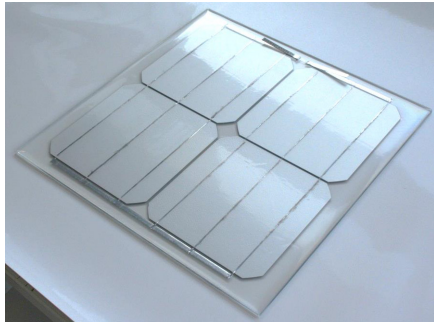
Four *FolMet* solar cells assembled to a small scale module with conventional soldering technique, enabled by a special foil treatment.
